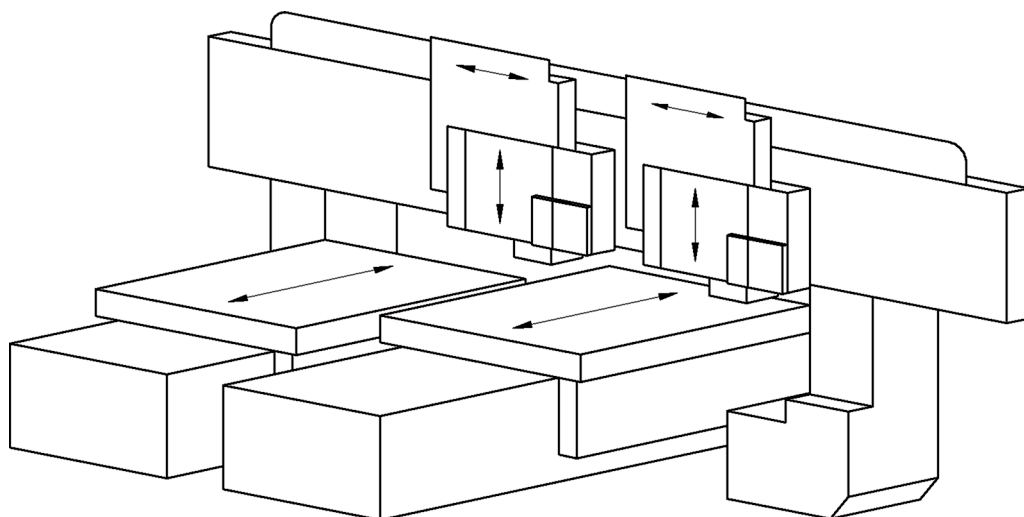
Example of portal frame machine with moving tables, fixed portal, moving machining heads
